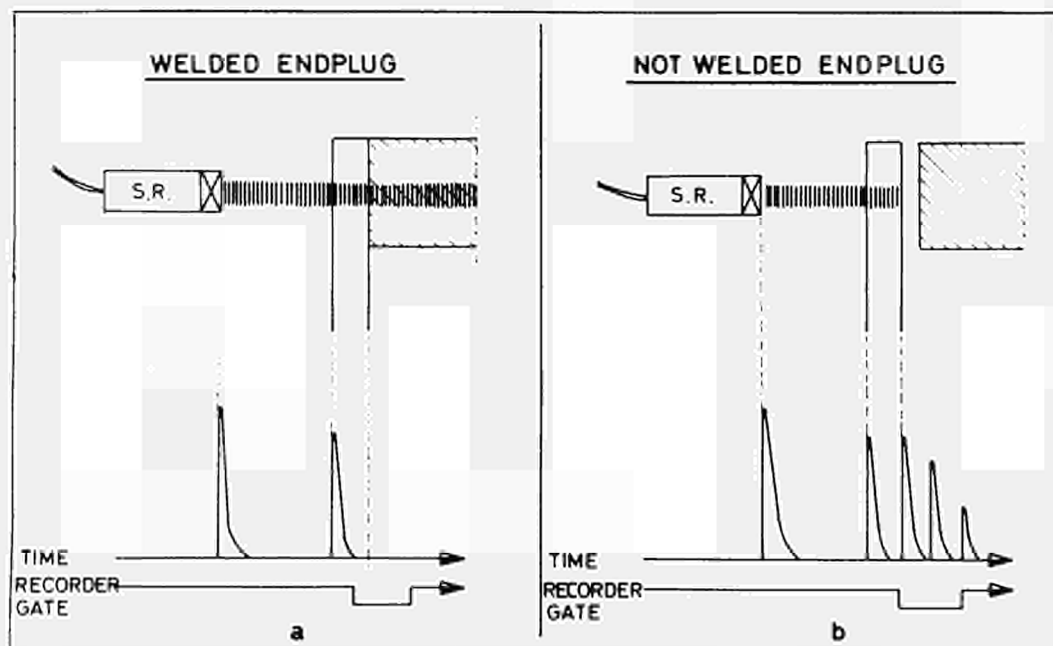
Weld control principle and ultrasonic instrument screen indications for a) welded end plug and b) unwelded end plug.
